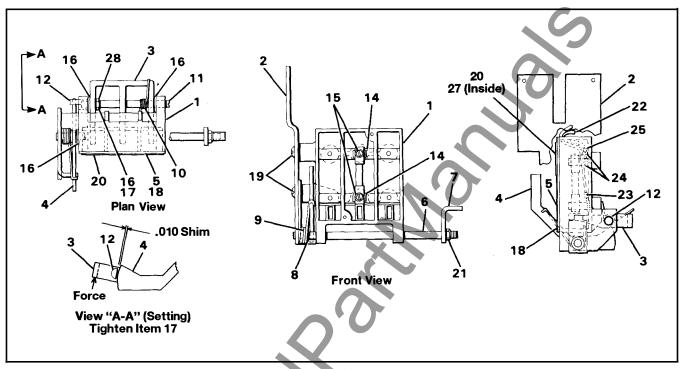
A. Trigger Fuse Assembly 18-399-796-501
